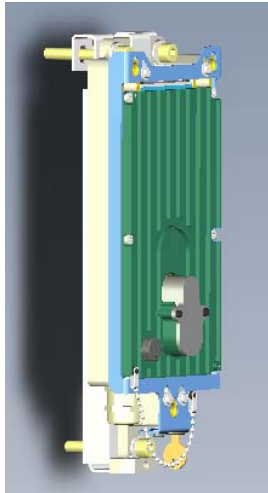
Wall mount bracketsRecommended wall anchor materials
